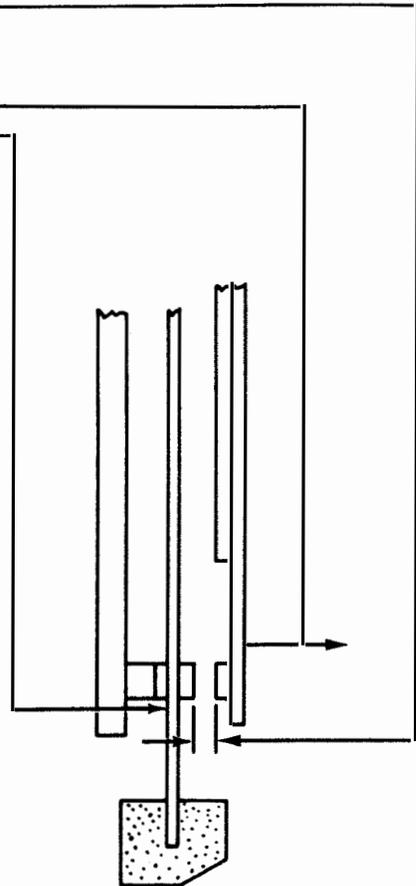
AUXILIARY CONTACT ASSEMBLY (PRELIMINARY)
